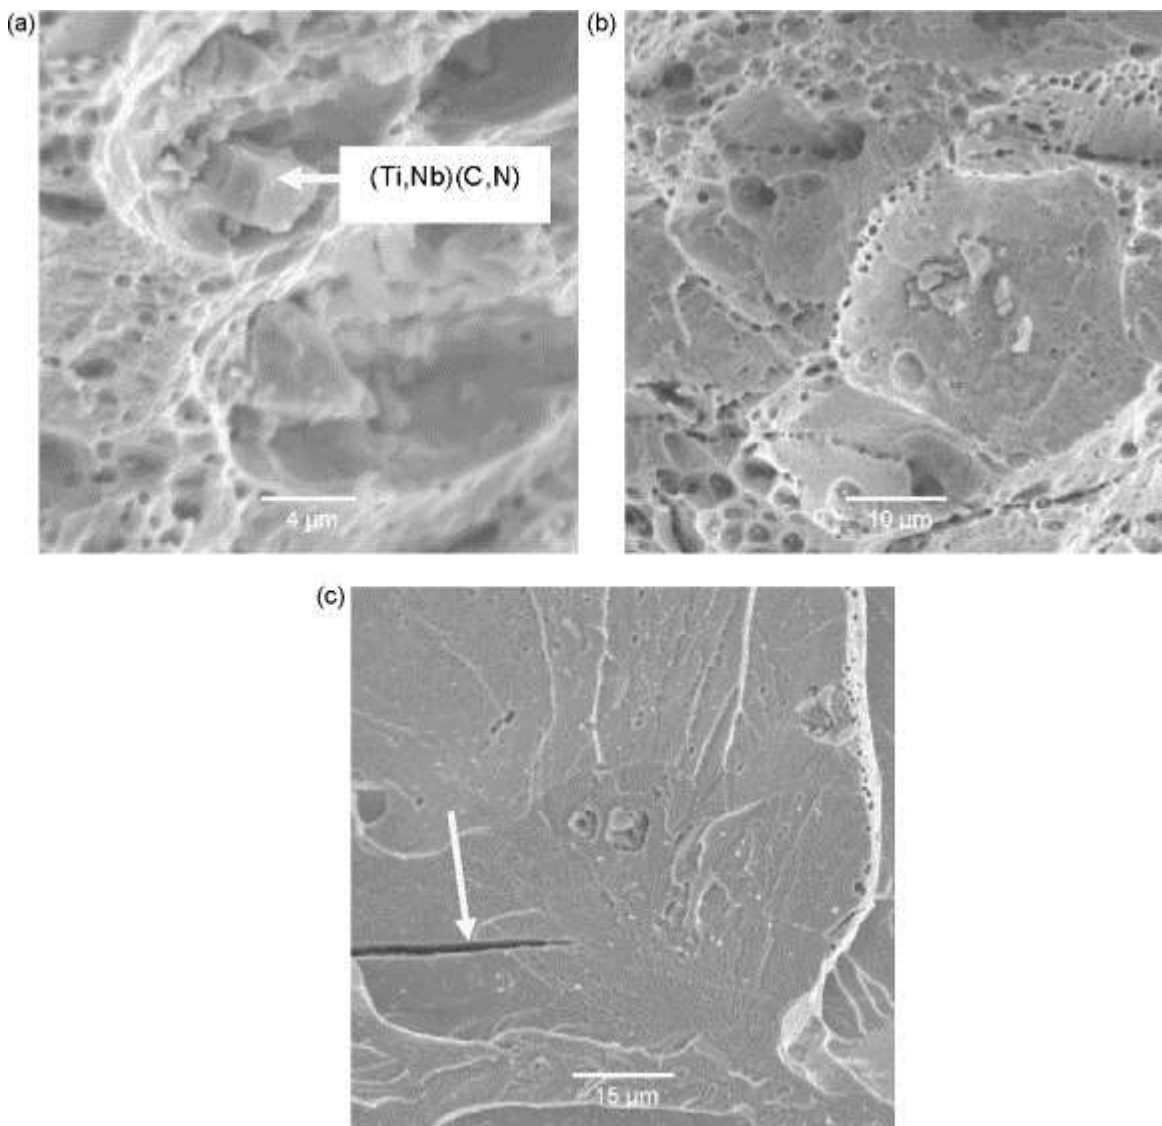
Examples of the Charpy fracture surfaces after annealing at the temperatures of: (a) as received specimen; (b) annealed at 850 °C; and (c) annealed at 900 °C. Note the arrowed internal cracks.
